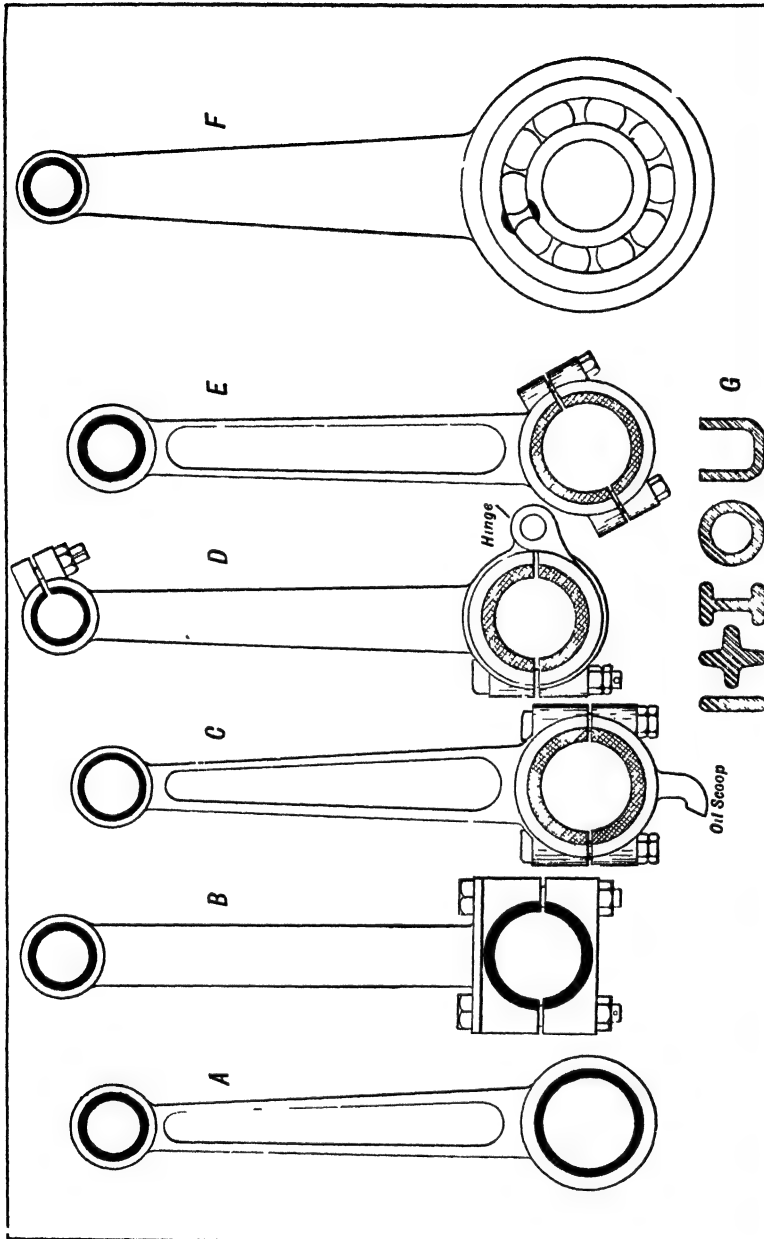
Connecting Rod Types of Automotive Engines Summarized. A—Connecting Rod Forged in One Piece, Used in Small Engines Having Built-Up Crankshafts. B—The Marine Type is a Popular Form on Heavy Engines. C—Conventional Automobile Type is a Modified Marine Form. D—Rod Having Hinged Lower Cap and Split Wristpin Bushing, Designed to Permit Easy Adjustment, is Suited for Slow-Speed Stationary Engines. E—Connecting Rod Having Diagonally Divided Big End. F—Connecting Rod with Anti-Friction Bearing in the Big End. G—Sections of Connecting Rods Showing Structural Shapes Commonly Employed.
